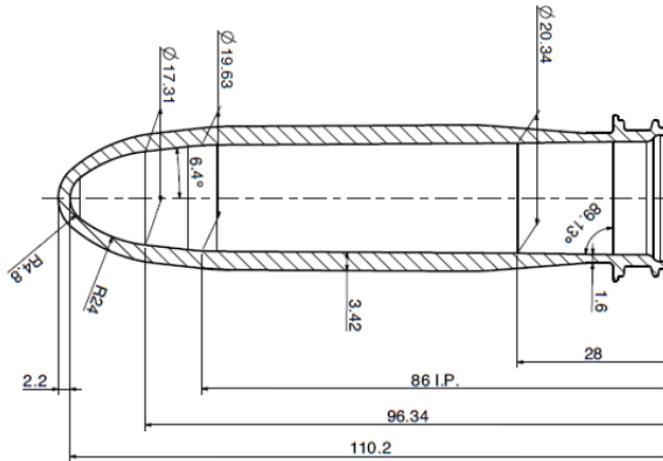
Technical drawing of 31g preform, designed by SIAPI for RE-PACKEDOILS Project.
